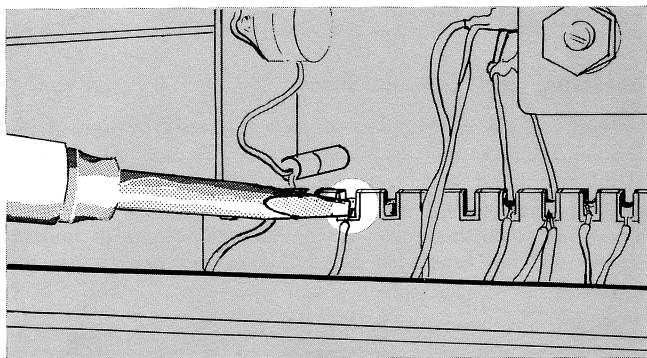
Correct method of applying heat in soldering to a ceramic strip.
